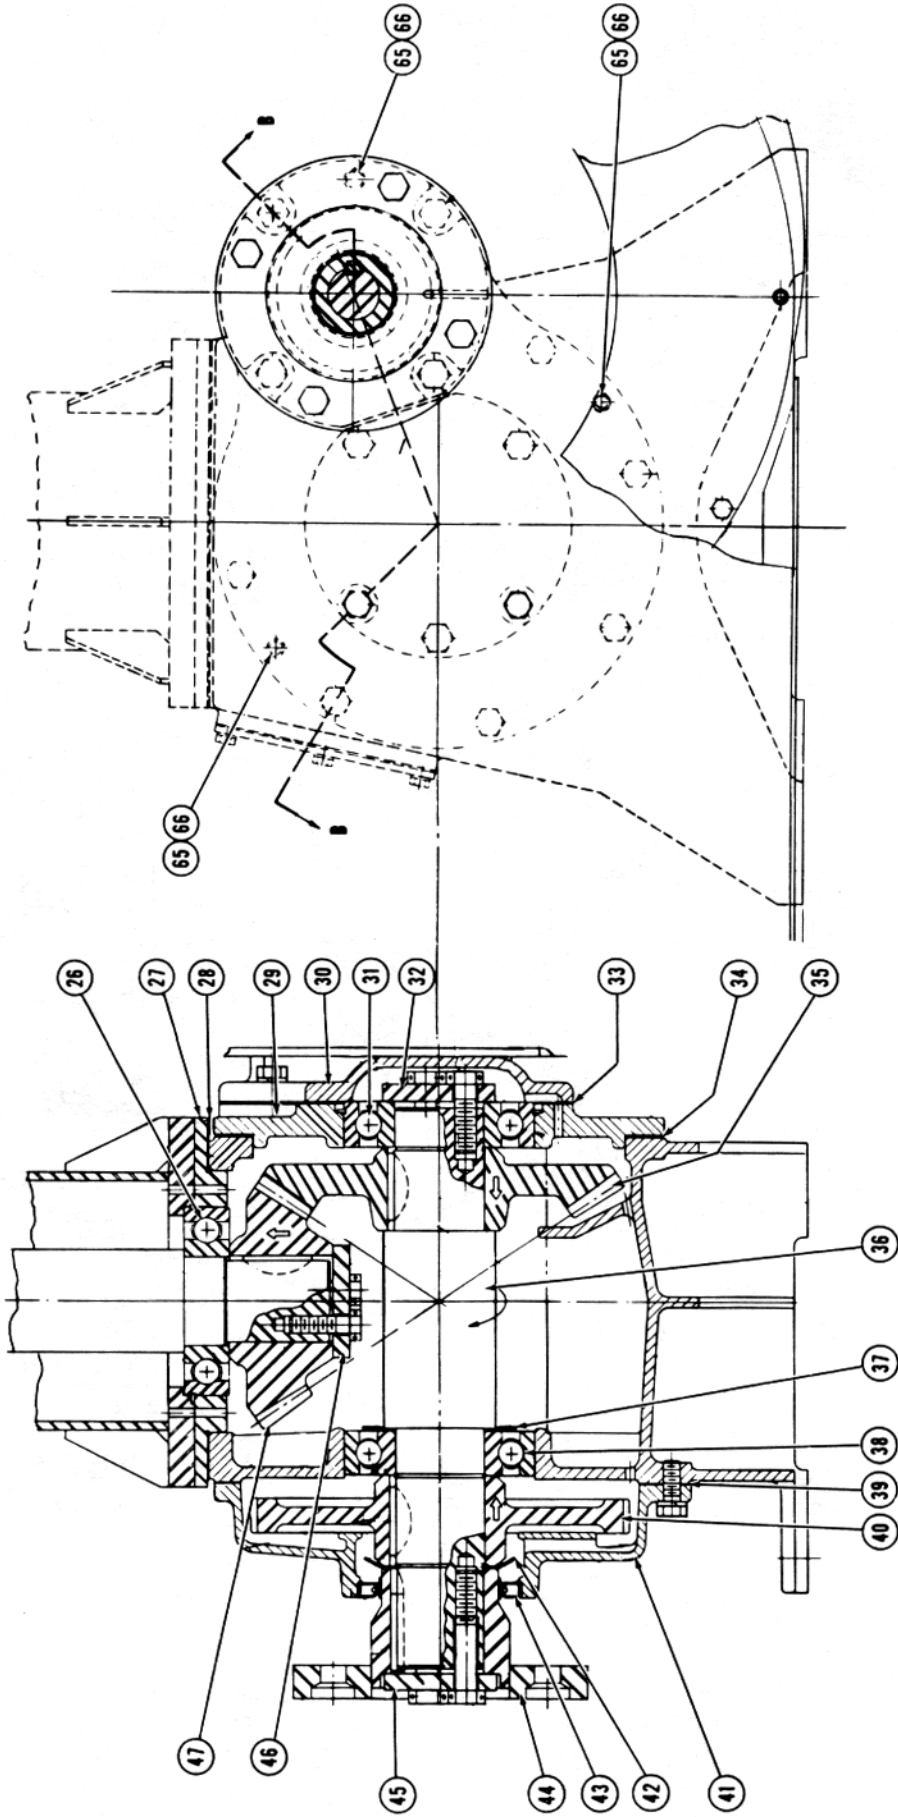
Cross-Section View Of Speed Increaser, Fan, And Blower Assembly 8253685
